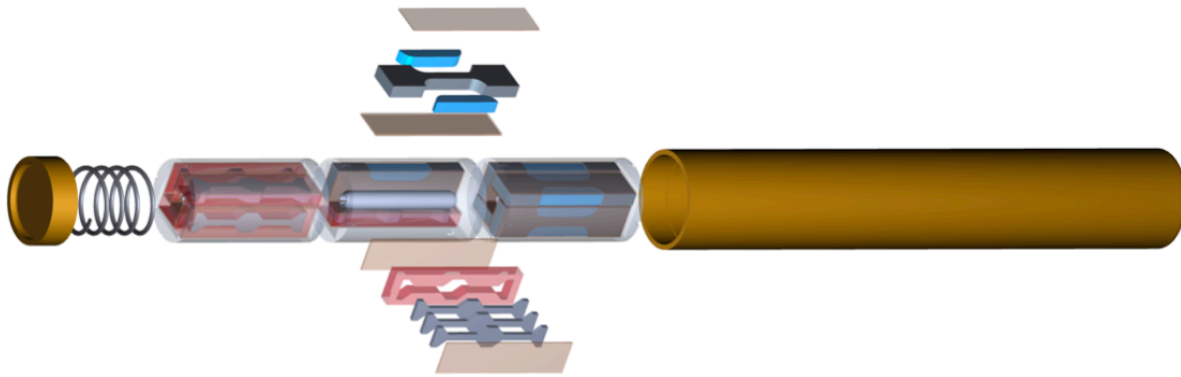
Finalized HFIR rabbit design for irradiation of welded and non-welded tensile specimens.
